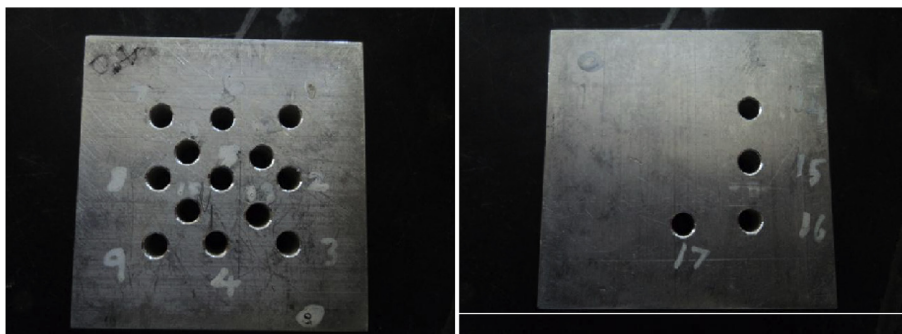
(a) shows the workpiece entry side in which the drill is started. The drill started from the entry side and finished at the exit side. Figure 2 (b) displays the exit side of the drilled hole in which the drill ends. The 6 mm diameter High
